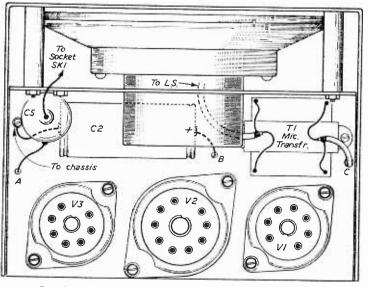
Above chassis view and wiring. See also Fig. 9.
